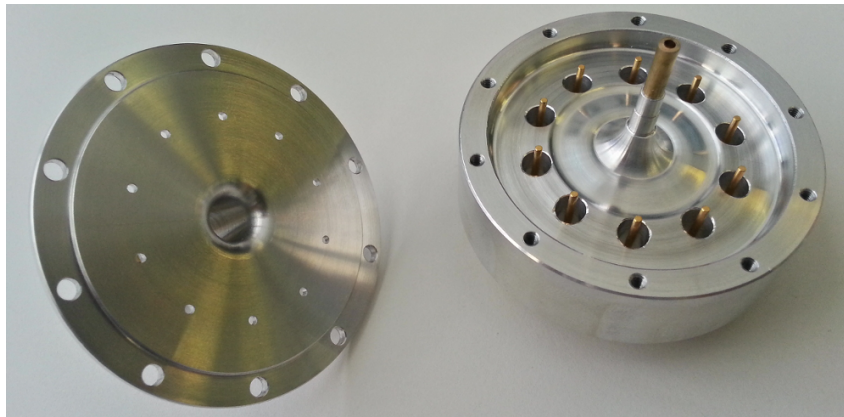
A photo of the manufactured top and bottom halves of the combiner.
